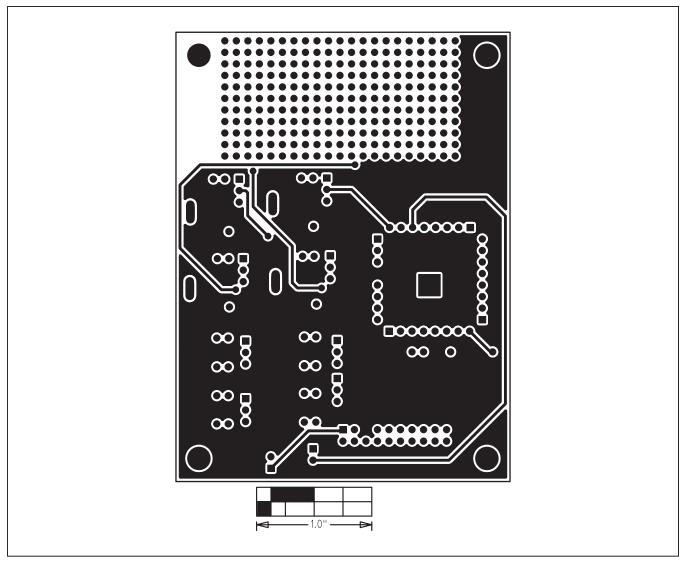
MAX6870 EV Kit PC Board Layout—Solder Side
